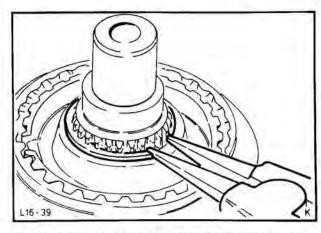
Remove circlip from 3rd/4th gear synchroniser hub
